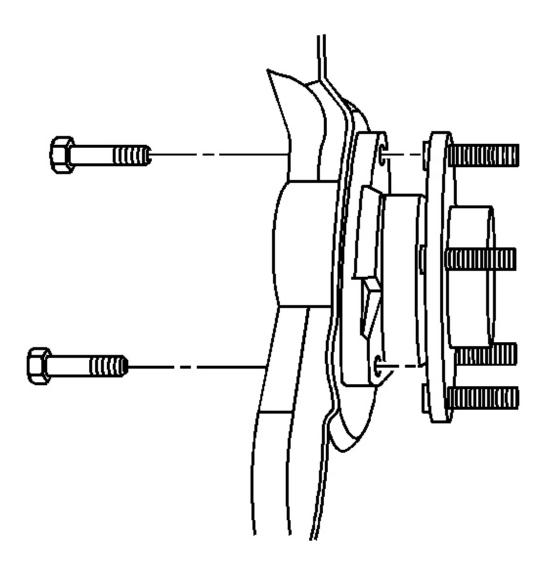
Identifying Wheel Hub Courtesy of GENERAL MOTORS CORP.
